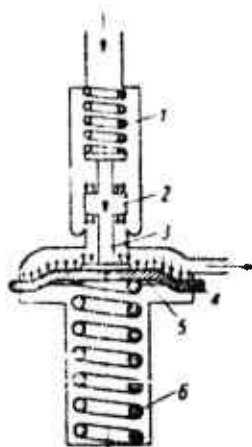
Spring type reducing valve: 1) spring; 2) port; 3) rod; 4) diaphragm; 5) control ring; 6) control spring.
